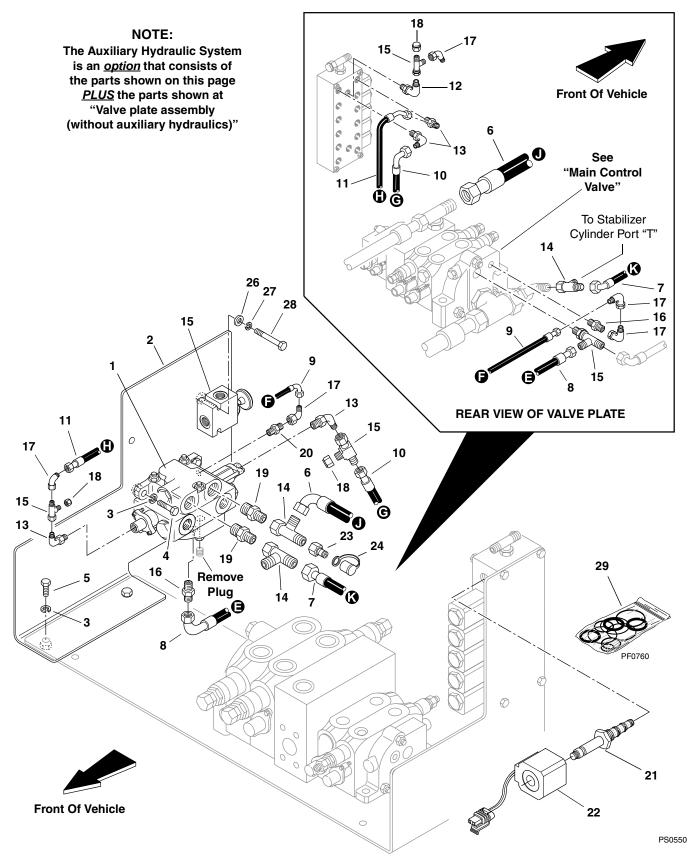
Main control valve plate assembly (with auxiliary hydraulics)
